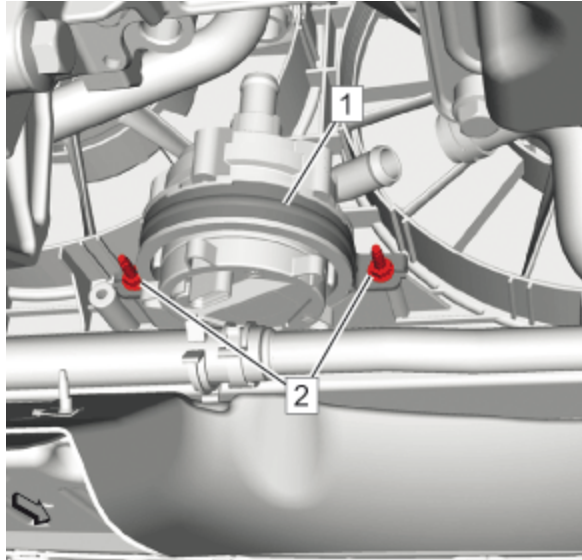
Drive Motor Battery Coolant Pump Bracket Stud
